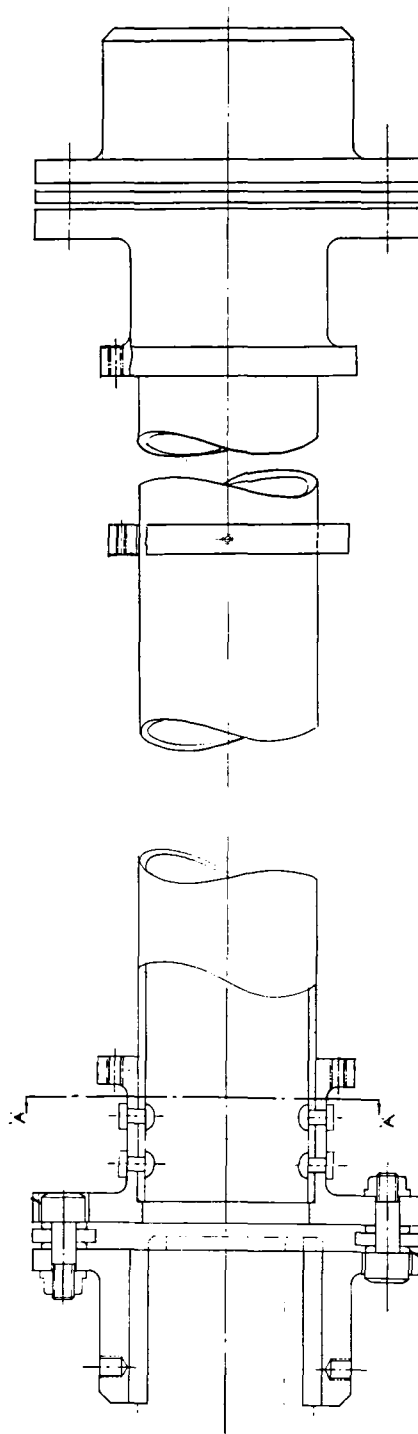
Assembly Drawing of High-Speed Test Shaft
